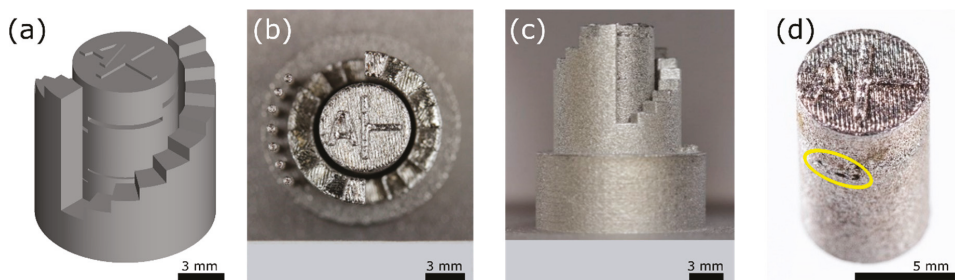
(a) CAD file of the specimen including the staircase; (b) Photograph of the produced specimen (top view, including the trigger pins) (c) Photograph of the produced specimen (side view) (d) Photograph of the specimen after the removal of the staircase. The yellow ellipse marks an open porosity of a non-exposed quarter.
